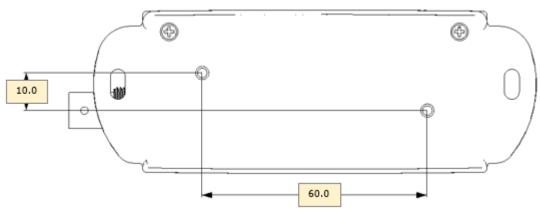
LDSBus pH Sensor Adapter Dimension – Bottom View
